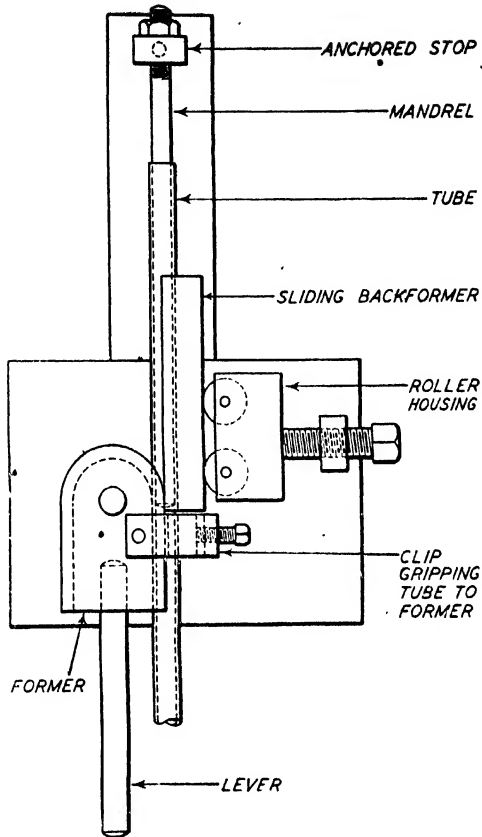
GENERAL ARRANGEMENT OF A DRAW-BAR MACHINE FOR BENDING LIGHT-GAUGE TUBES
